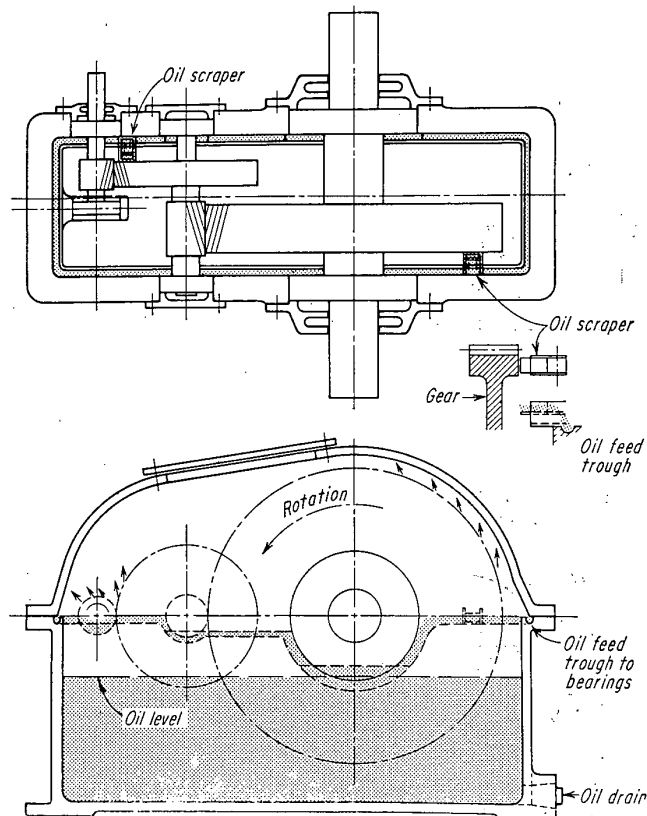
Method of feeding oil to bearings at very slow speed without forced feed.
